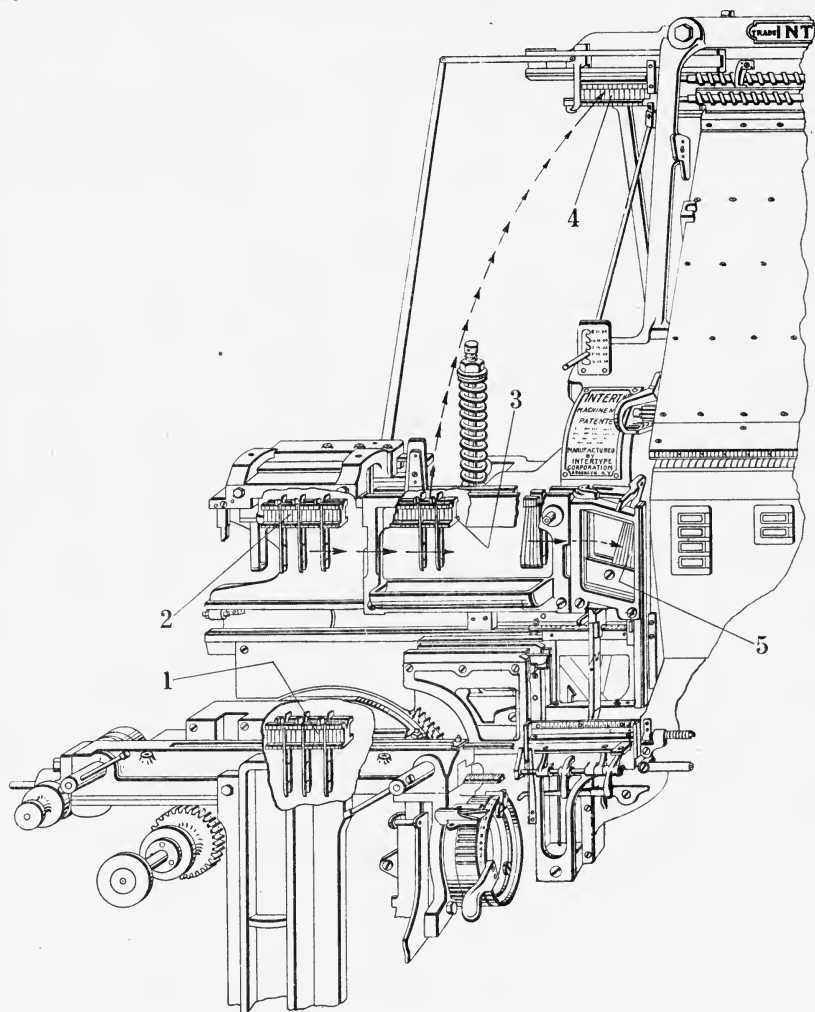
The Distributing Mechanism. This view represents a matrix line before the mold just after a slug has been cast. The mold disk will now be revolved through three-quarters of a revolution to present the mold (containing the slug) in a vertical position opposite and parallel to the trimming knives. During the time the mold disk revolves, and while the slug is being ejected, the matrices are automatically conveyed to the distributor and the spacebands are returned to the spaceband box.
